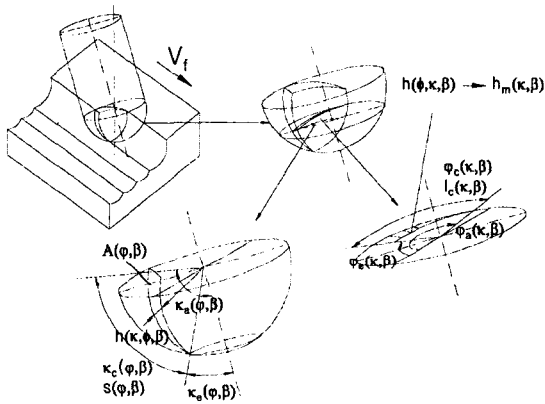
Cutting parameters used in ball end mill with tilt angle
